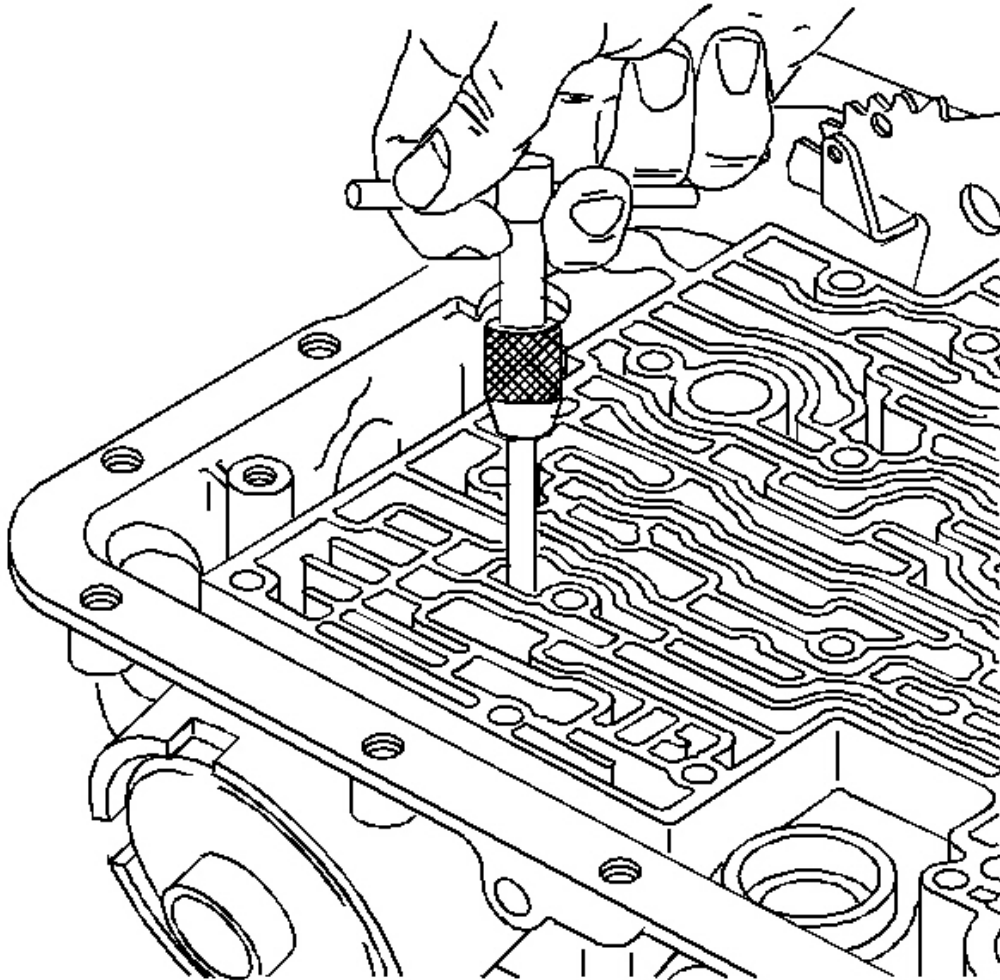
Extracting Third Accumulator Retainer And Ball Assembly
